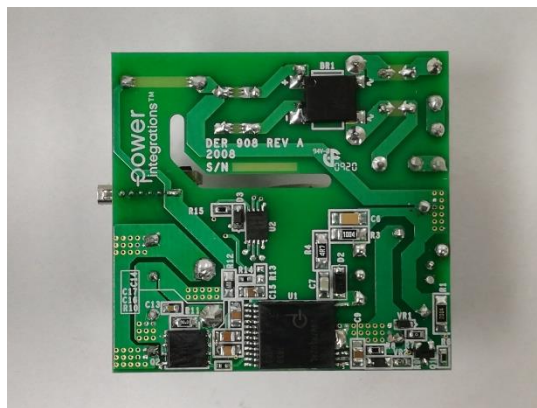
Populated Circuit Board Photograph, Entire Assembly.
